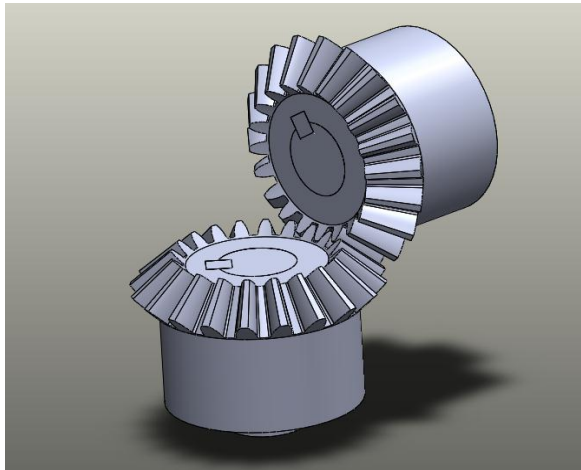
Bevel Gear Fig.3 Bevel Gear Terminology
